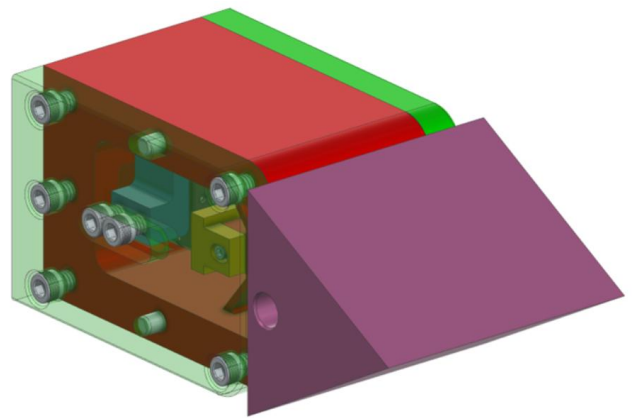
First concept sting design with compliant mechanism and revised optical mounting.
